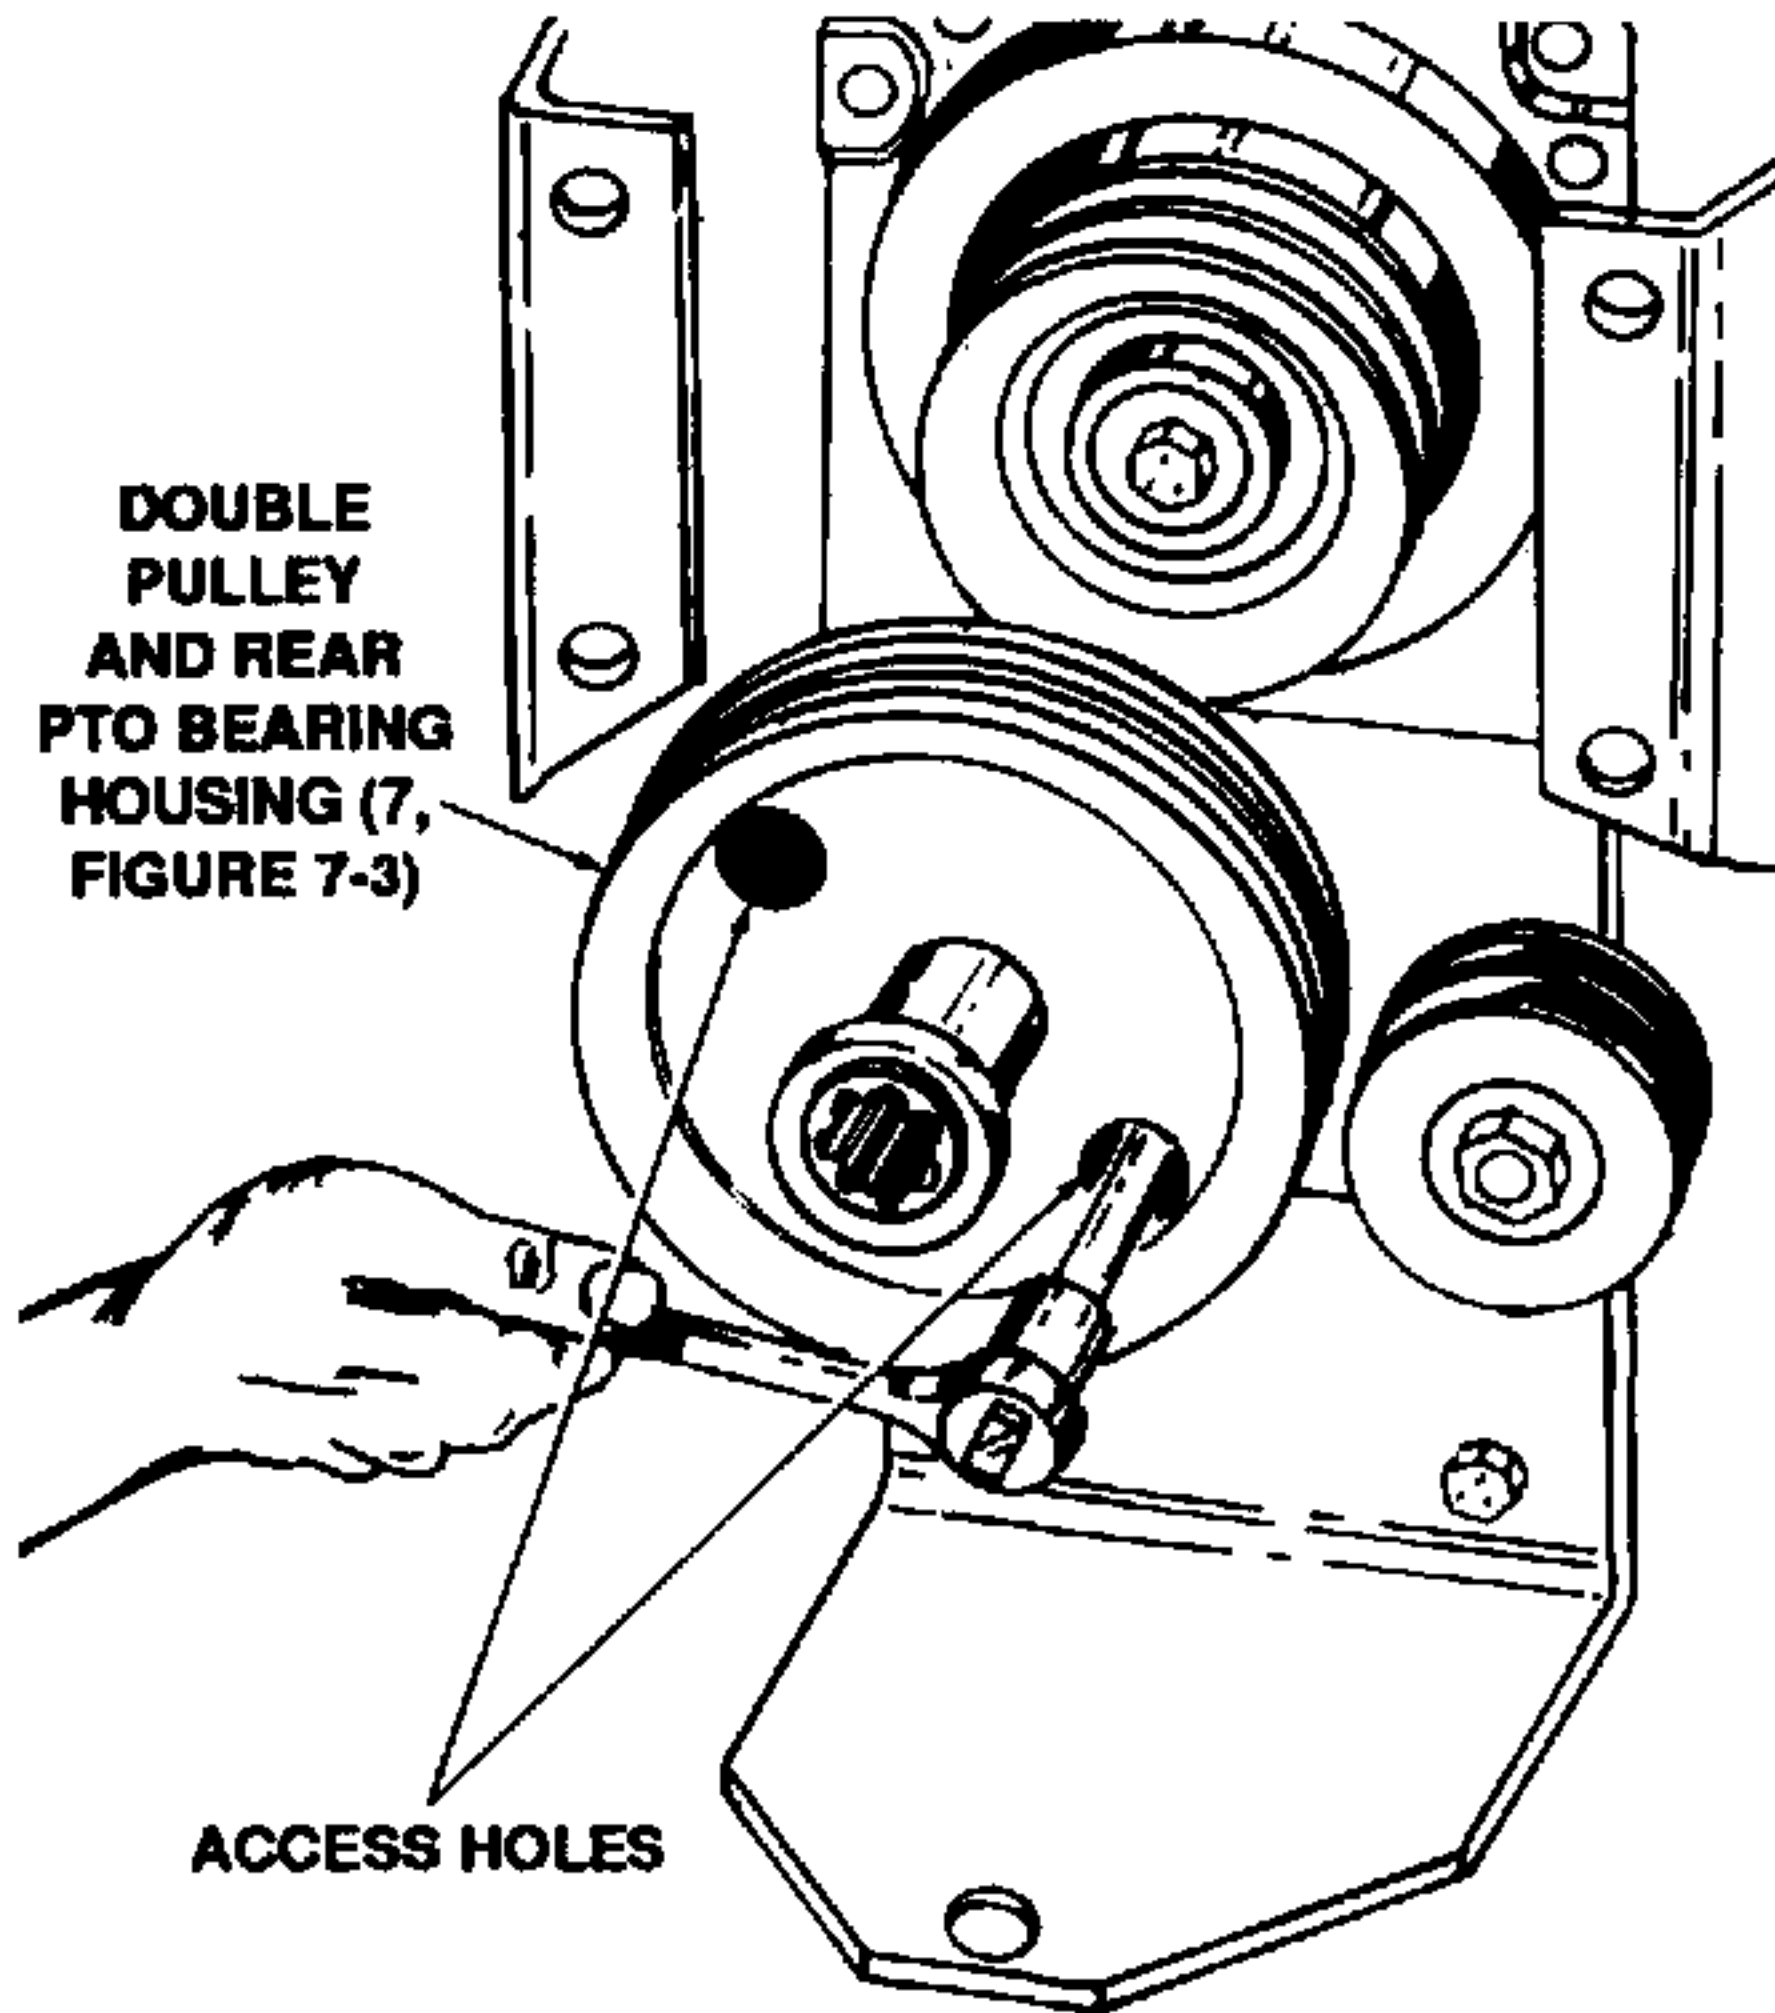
Tightening Lock Nuts In Double Pulley.
